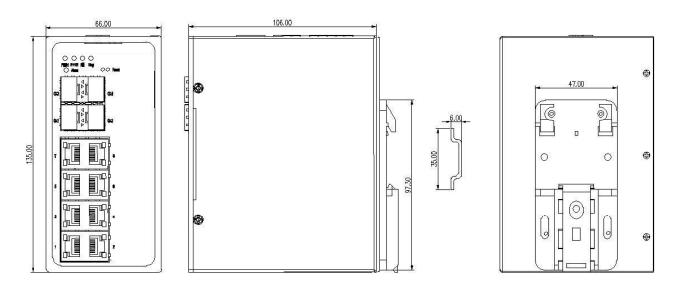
Dimensions for Small Products DIN-Rail Mounting (unit: mm)(Large DIN-Rai)
